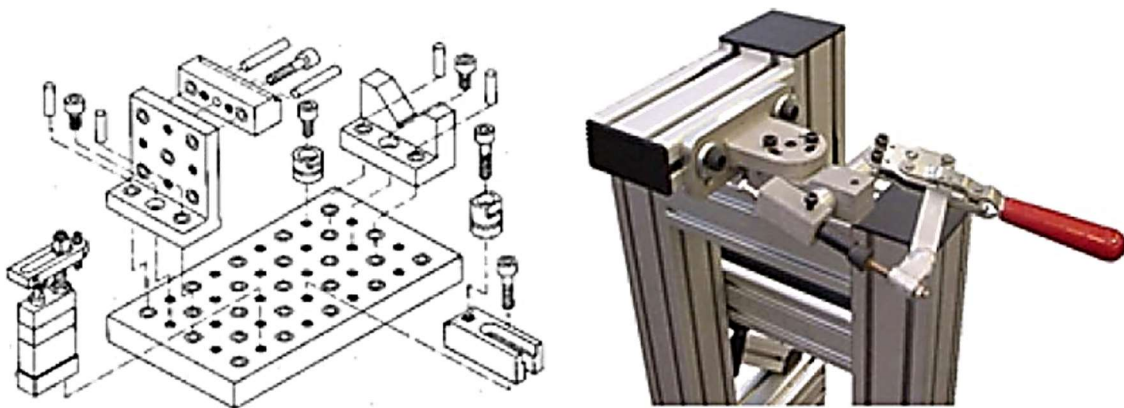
Left A typical modular fixturing kit for machining. Right A modular kit for assembly.
